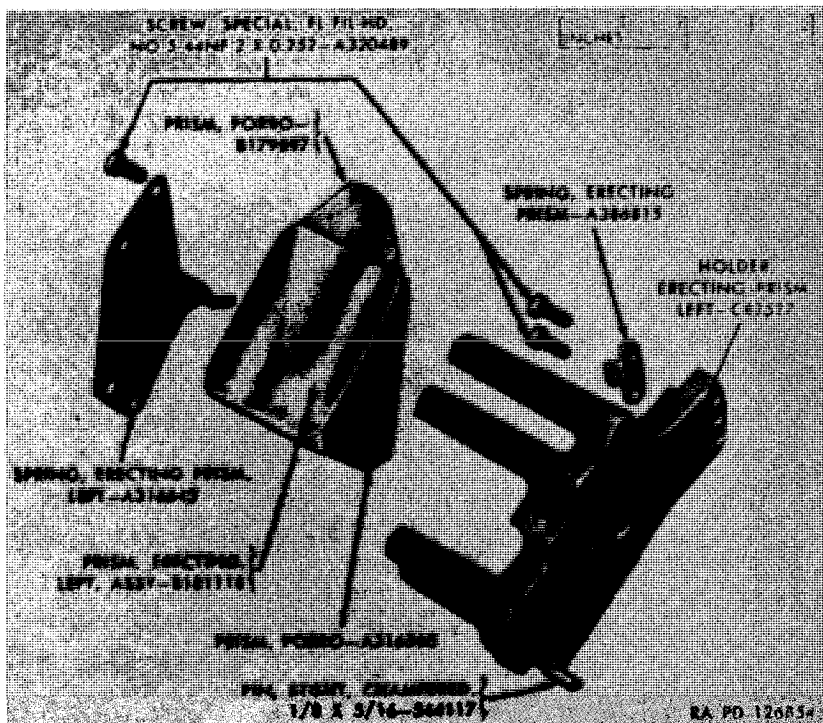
Left erecting prism holder assembly C82526 - exploded view.
